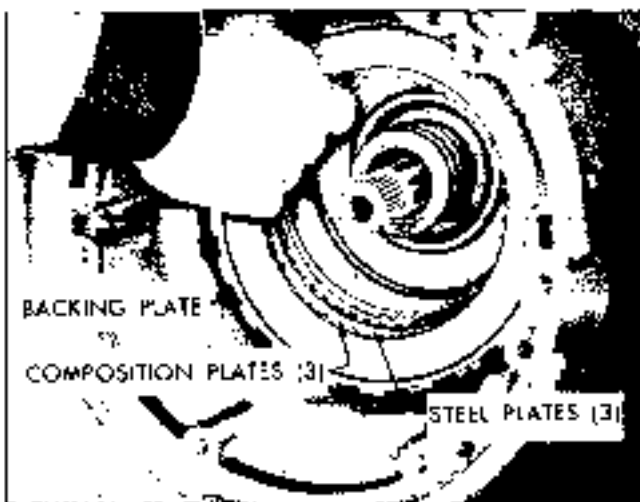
E-45 Removing Intermediate Backing Plate and Clutch Plates
